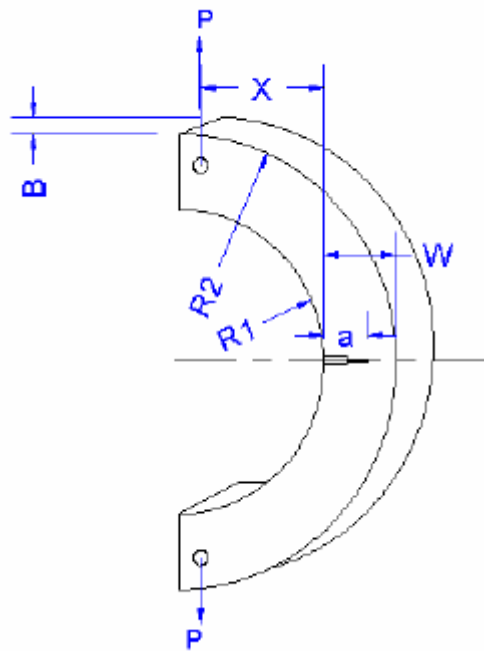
C-Shape Specimen fracture toughness test geometry.
